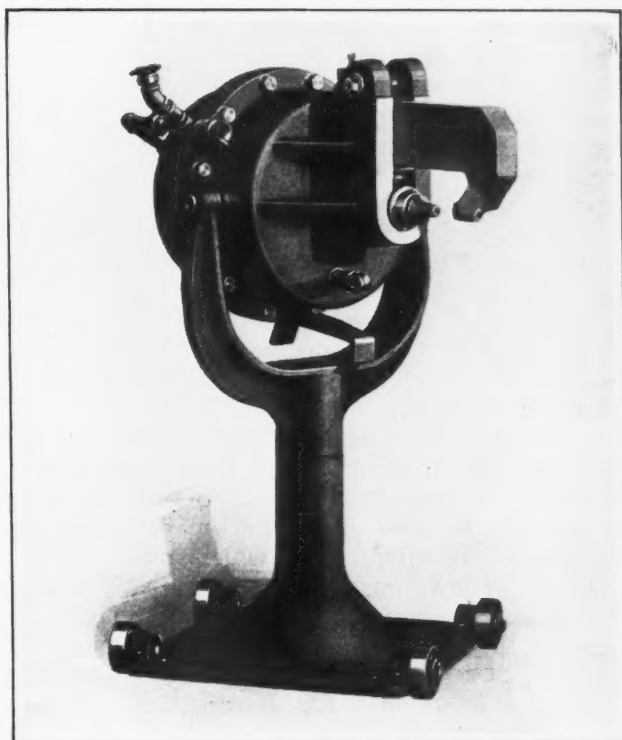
Push-type Riveter for Use in Manufacturing Automobile Chassis Frames
